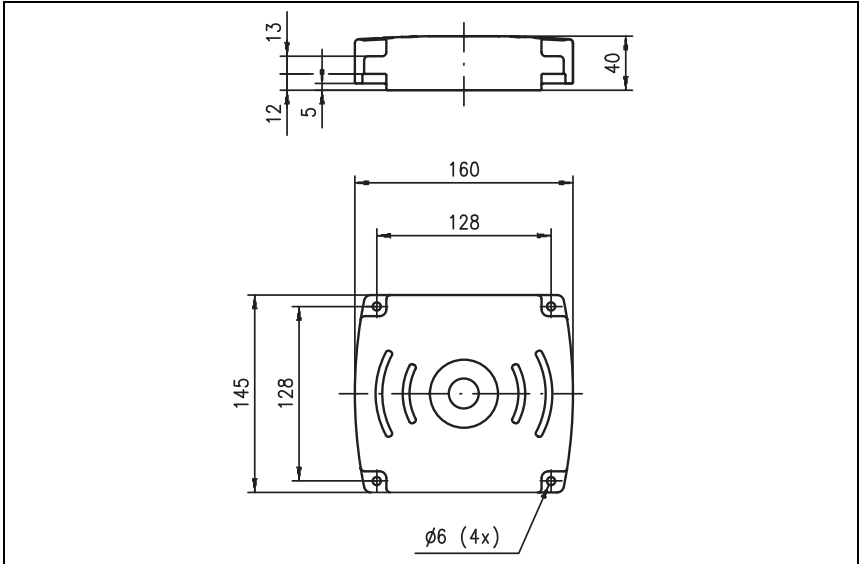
Dimensioned drawing of the RFU 61 SL 100-EU read/write system
